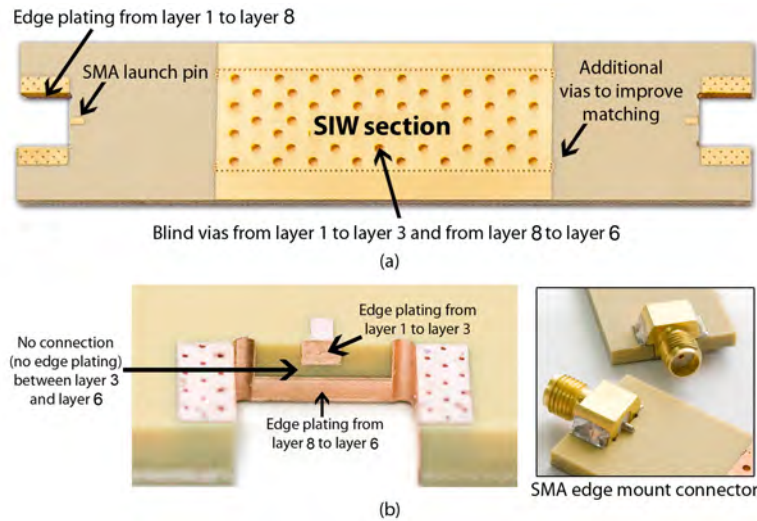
Manufactured PCB, (a) top view and (b) side view.
